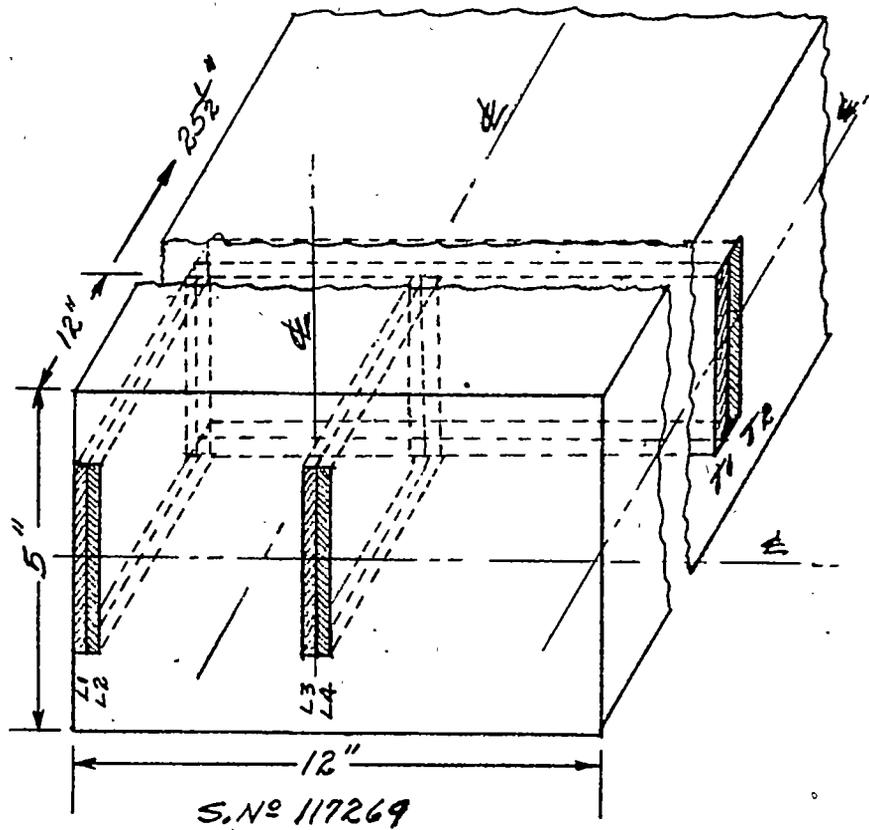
Locations in 14S-T6 aluminum-alloy hand forgings from which bearing specimens were obtained. Specimen size, 3/16 inch by 2 inches by 12 inches.
